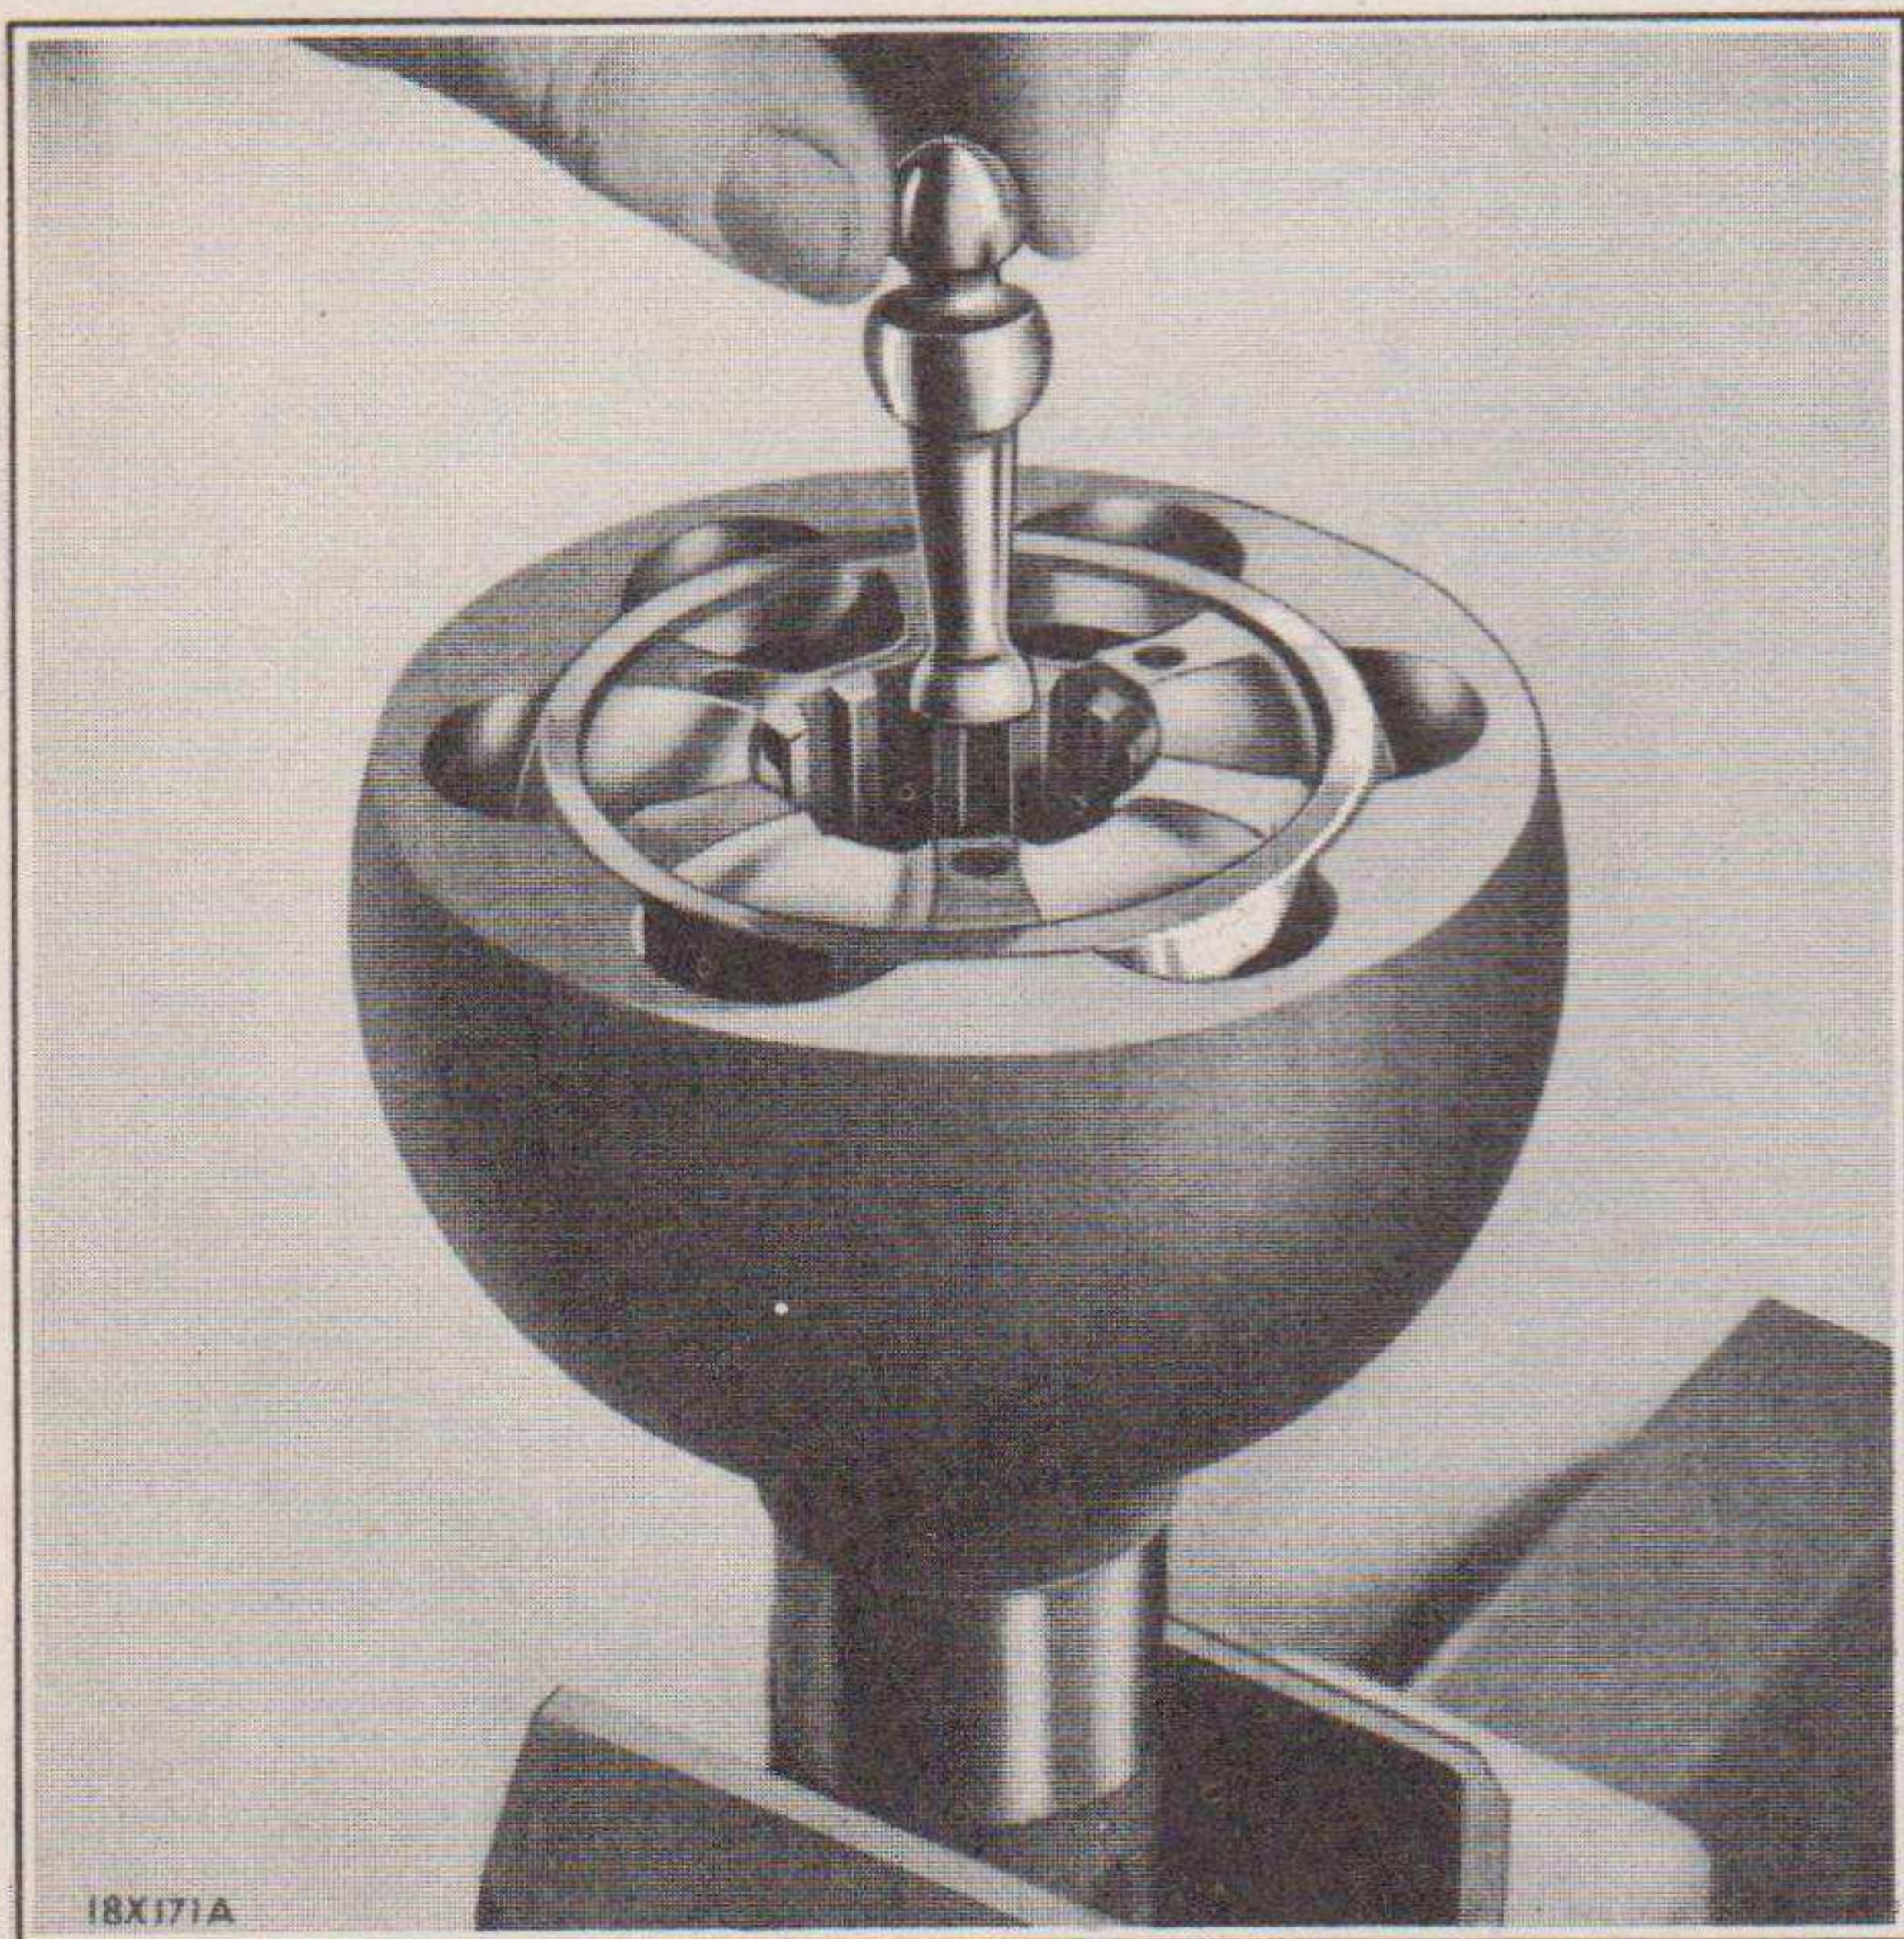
Removing or Installing Universal Drive Pilot Pin (Rzeppa)
